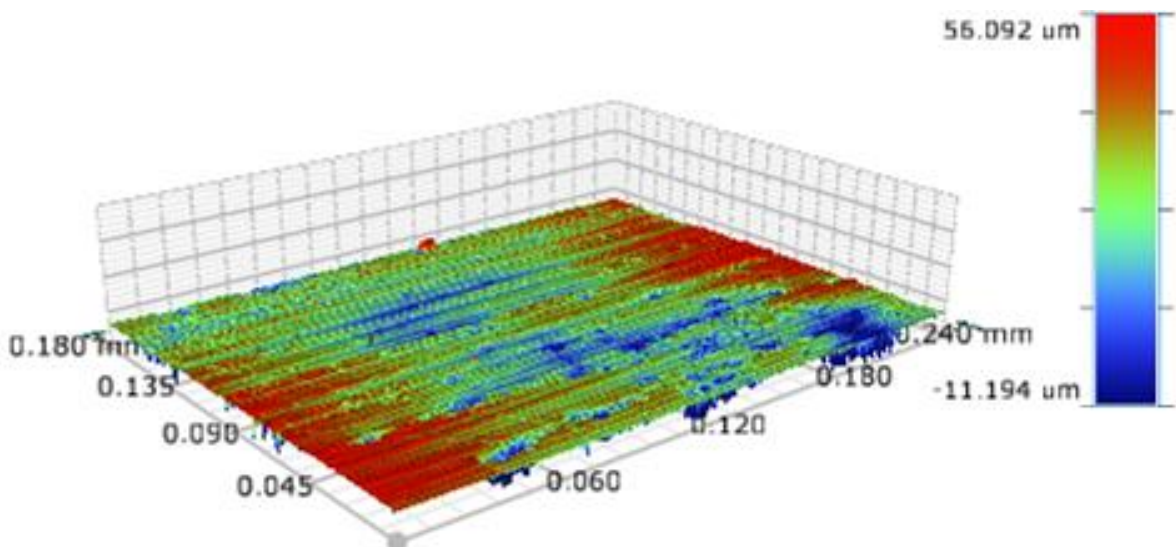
3D view of Side 1, spot 1 at anodized miniature ski prototype before friction tests
